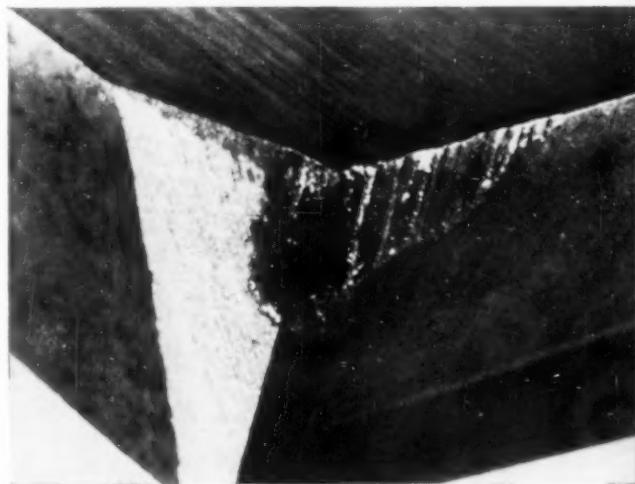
(above) Flank wear and cratering on carbide tip used for milling at 15,000 fpm.
